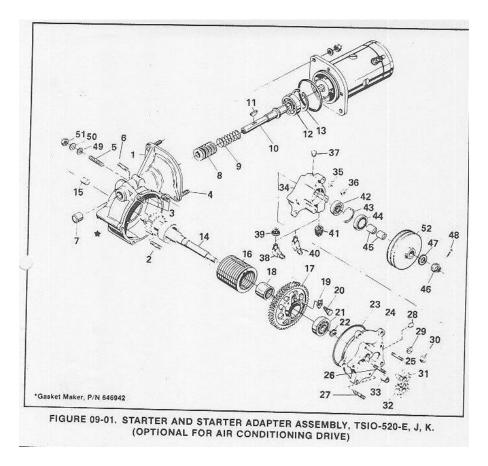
Showing Starter clutch assembly with optional air-conditioning drive.
